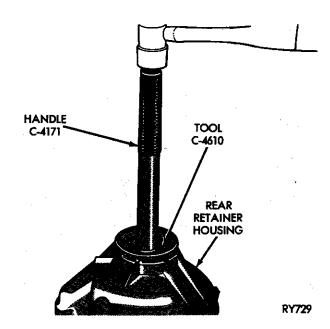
Removing Mainshaft Rear (Output) Bearing
